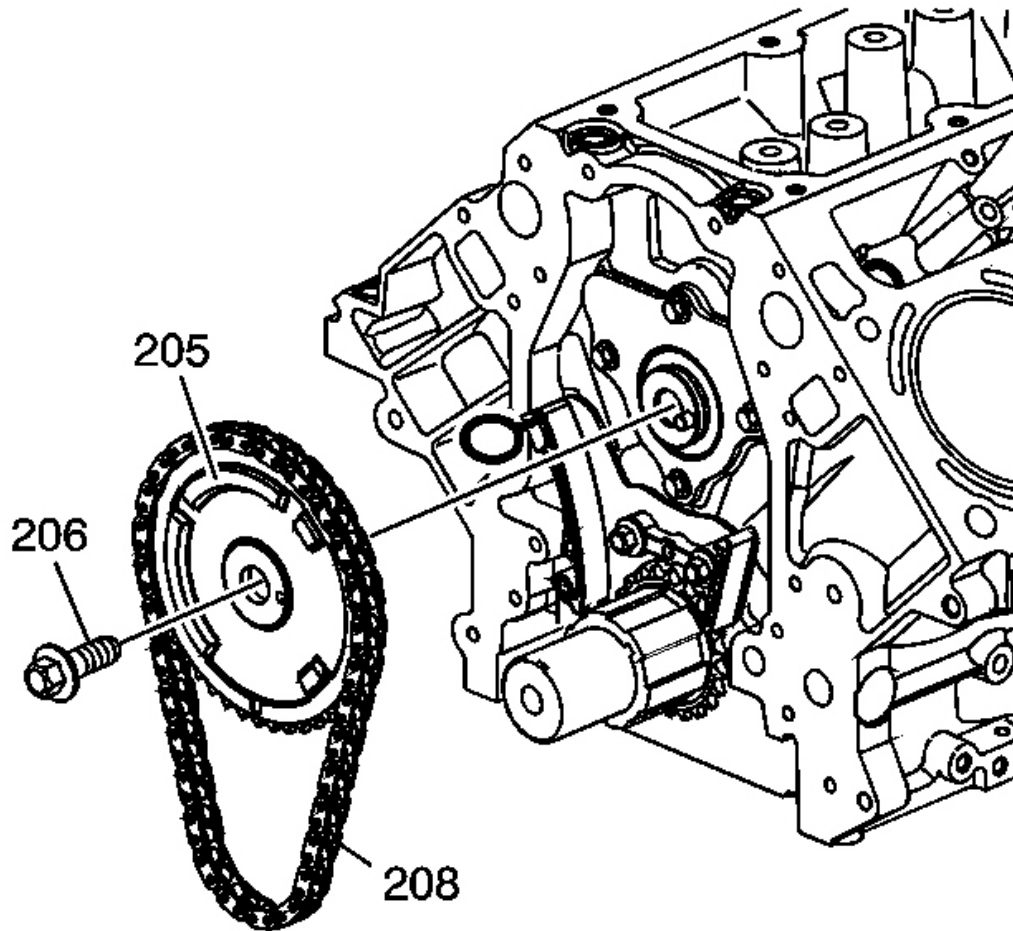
View Of Camshaft Sprocket & Timing Chain
